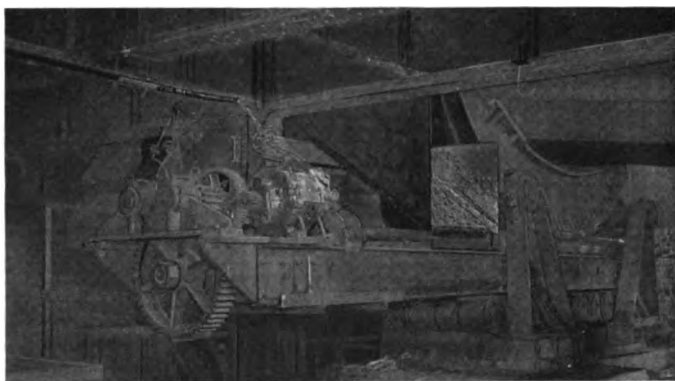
DETAILS OF TILTING ARRANGEMENT UNDER ONE END OF FURNACE, SHOWING MOTORS
